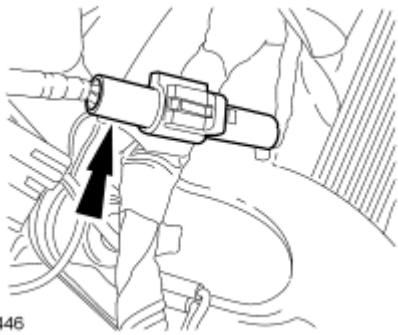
Locating Knock Sensor (KS) Electrical Connector And Wiring Harness Pin-Type Retainer
